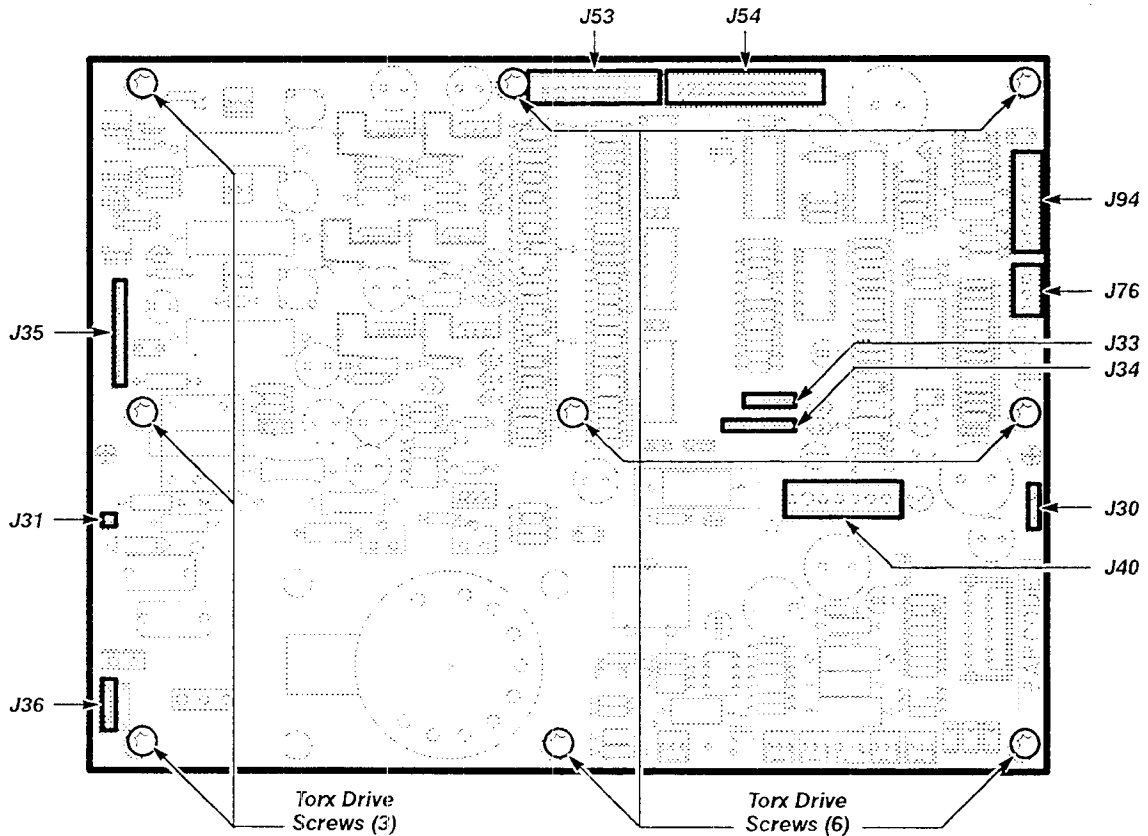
Removing/Replacing the A24 CRT Driver Board
